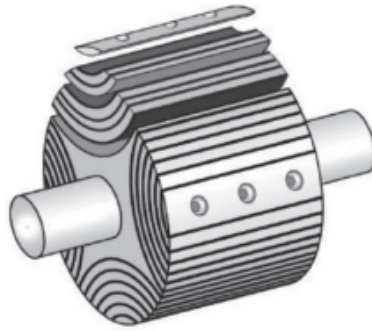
A sketch of an ALA rotor indicating the stacking of the sheets and barriers [8] (edited).
